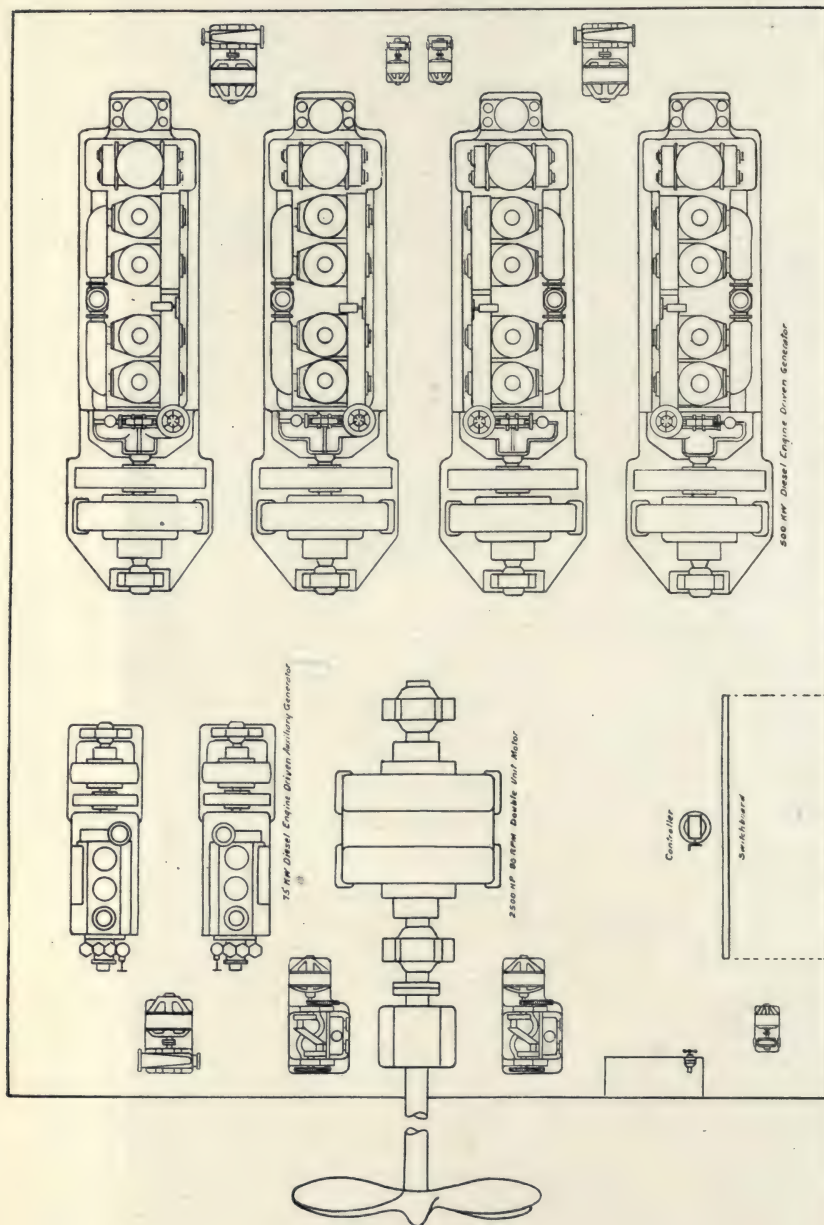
Plan View of Engine Room for a 2500 S. H. P. Diesel Electric Drive
